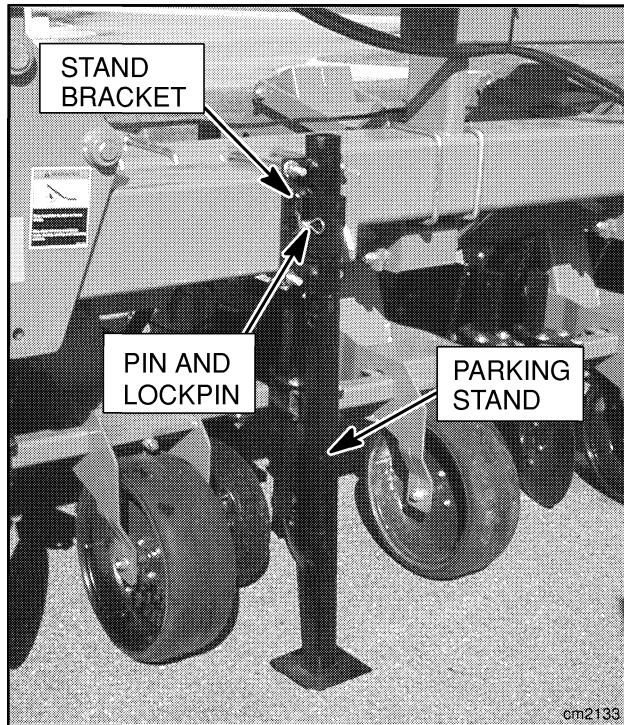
Front Parking Stand Lowered and Pinned (Typical toolbar shown)
